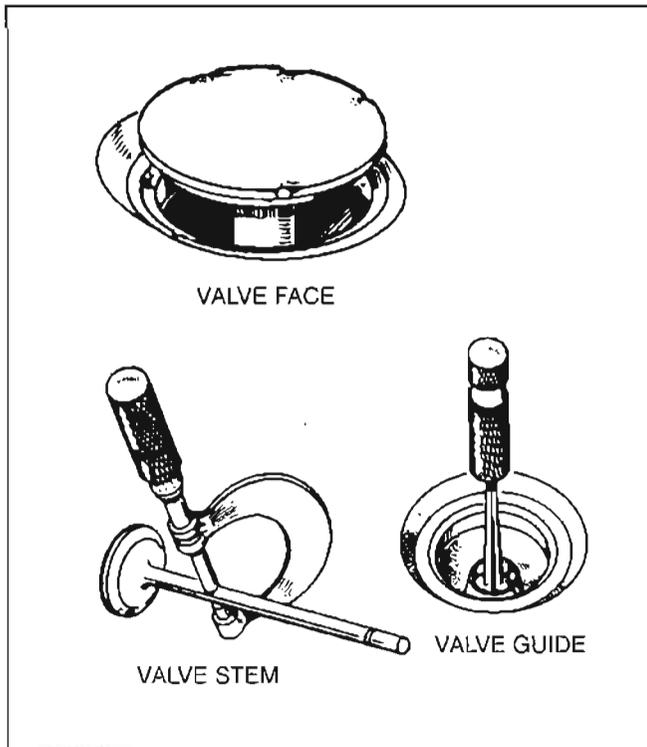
VALVE FACE, VALVE STEM AND VALVE GUIDE INSPECTION
